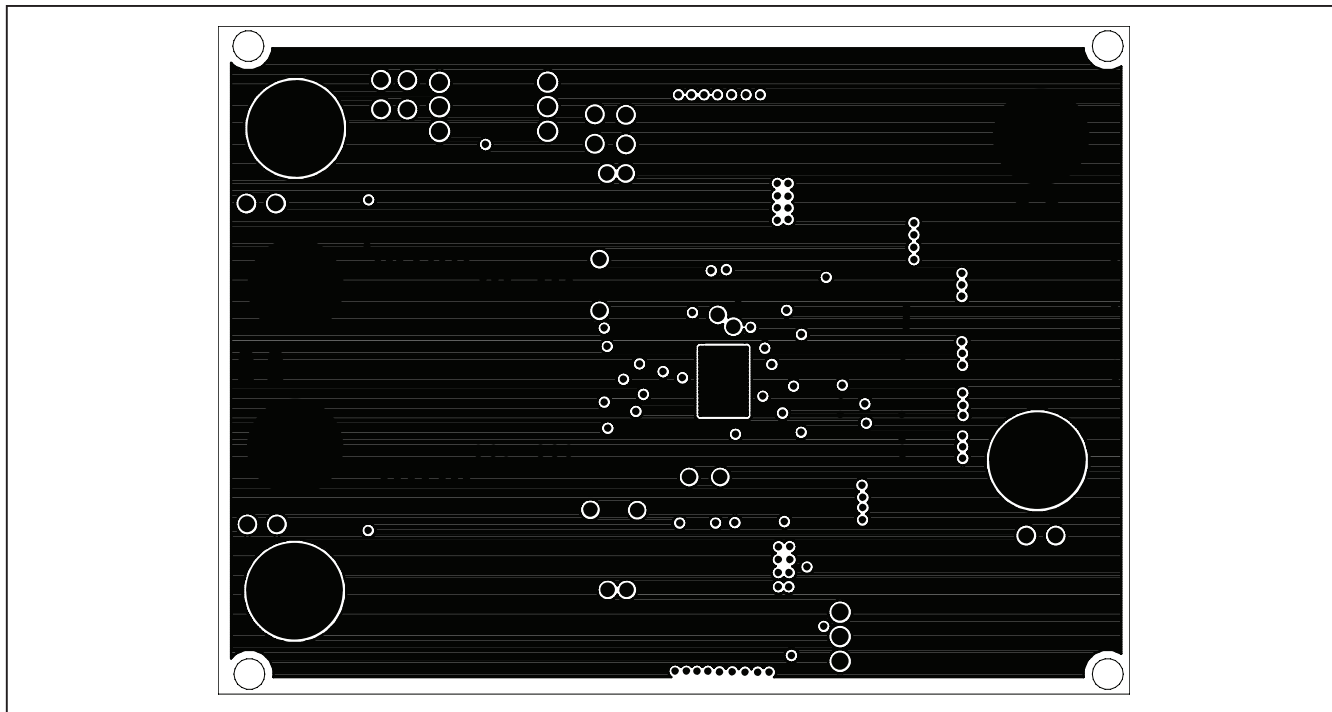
MAX15034B EV Kit PCB Layout—Internal Layer 2—PGND Plane
